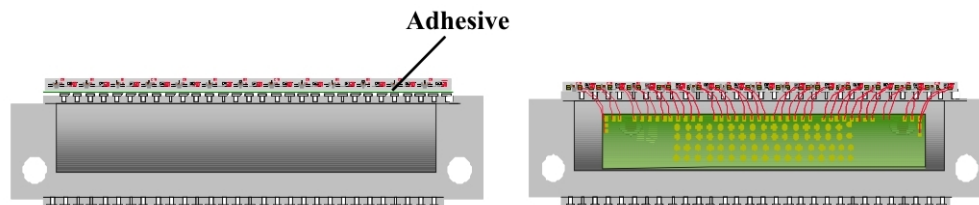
Fixture for holding bar and connecting bar with printed circuit board.
